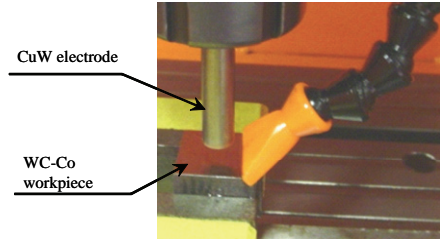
Assembly of WC electrode and WC-Co workpiece at the EDM machine tool.
